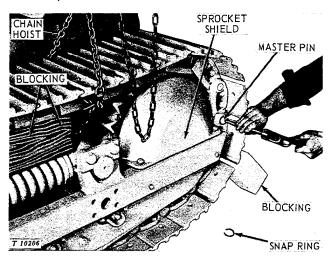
Removing Track Master Pin to Separate Track
